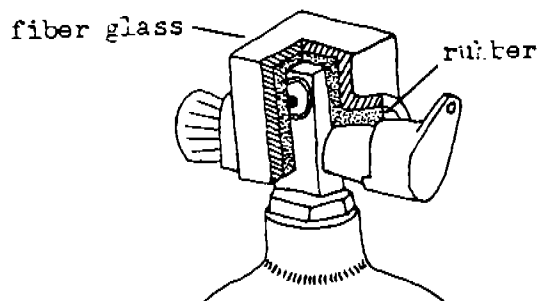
Tank J Valve With Cutaway View Of Cover.
